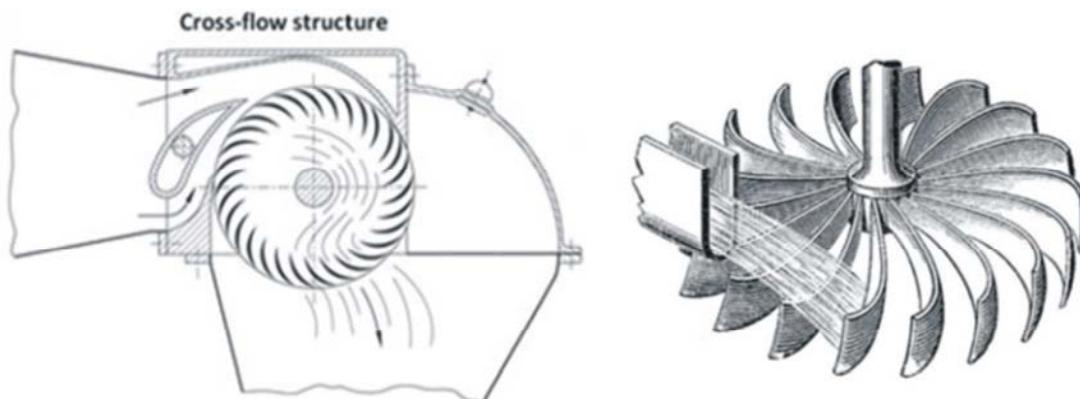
Crossflow turbine – "Ossberger turbine" (left side) [9], horizontally mounted water wheel – "Stoßrad" (right side) [10].
